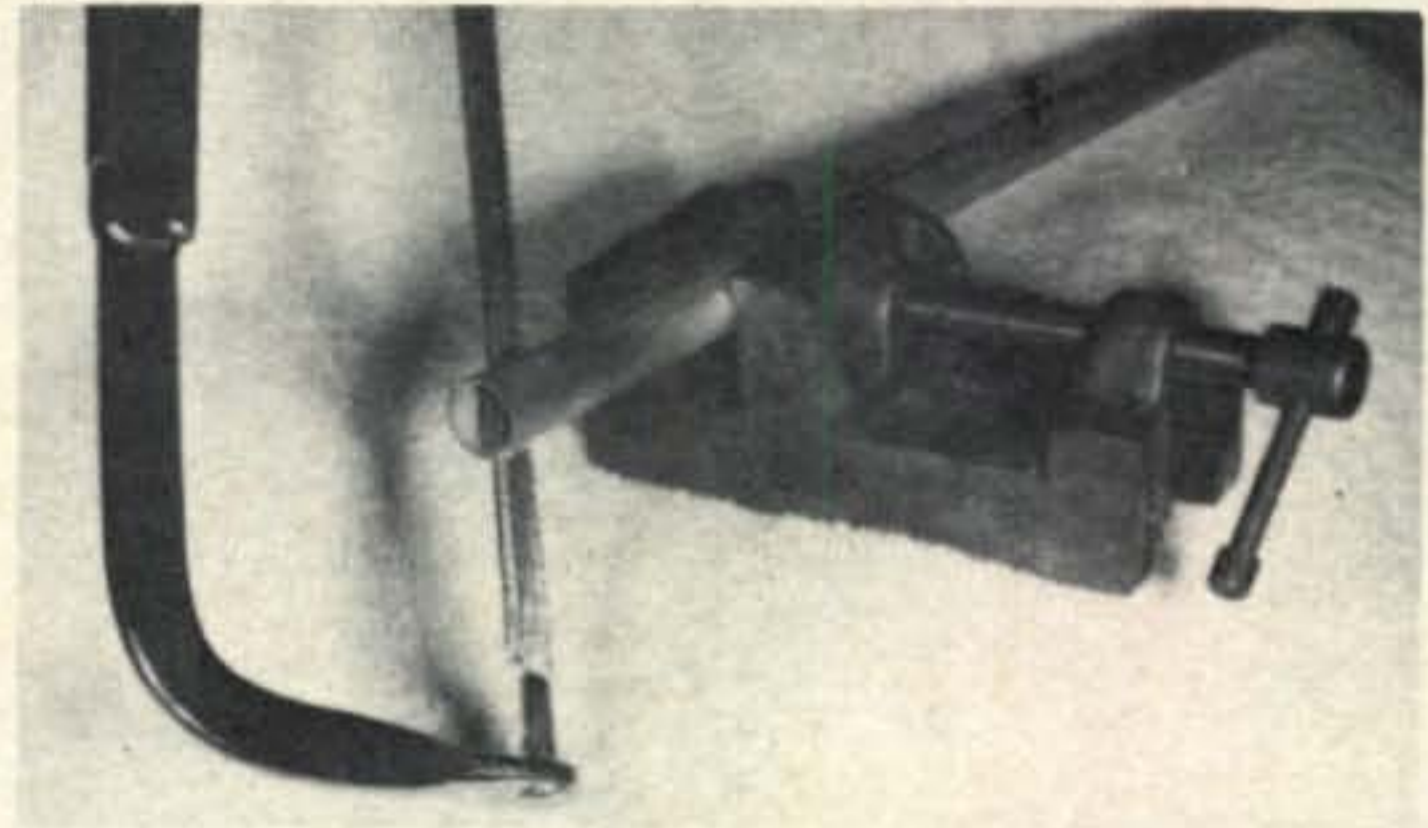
Slotting one end of the 7/8" and 1" o.d. tubes will permit hose clamps to set the interlocking tubes. A fine tooth blade on the hacksaw permits smooth cuts. Slanting back slightly when starting the cut and then squaring off at the end is recommended.
